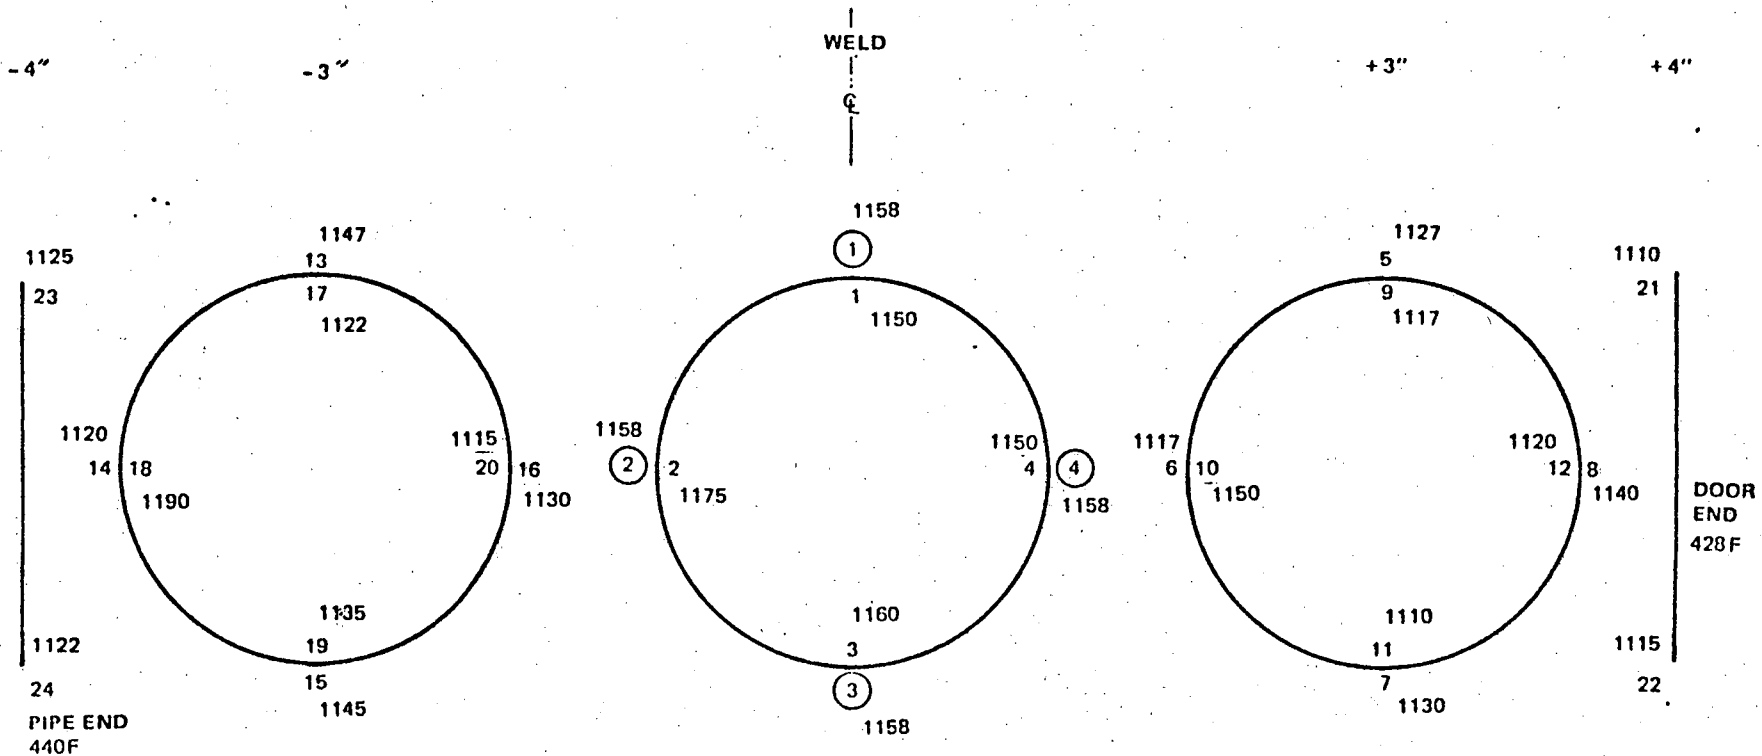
INTERNAL HEATER TEST ASSEMBLY
